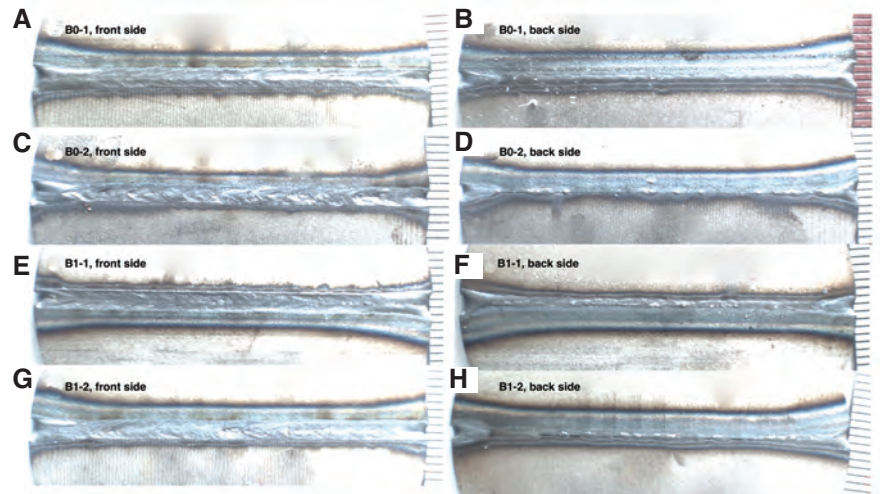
Front side weld formation. A — Specimen B0-1; C — Specimen B0-2; E — Specimen B1-1; and G — Specimen B1-2. Back side weld formation. B — Specimen B0-1; D — Specimen B0-2; F — Specimen B1-1; and H — Specimen B1-2.
